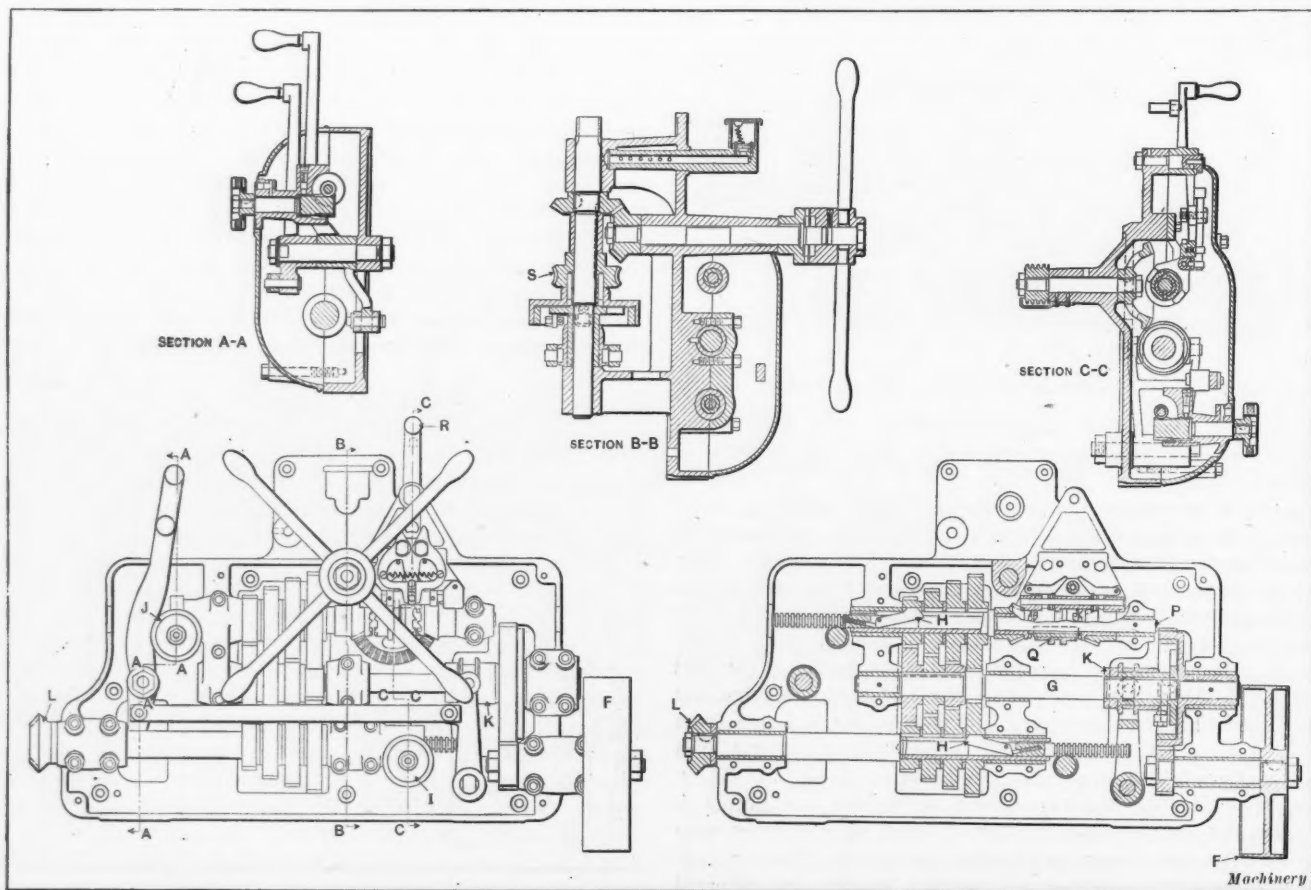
Arrangement of Gearing in Speed and Feed Box, and Transmission to Wheel-spindle Slide
